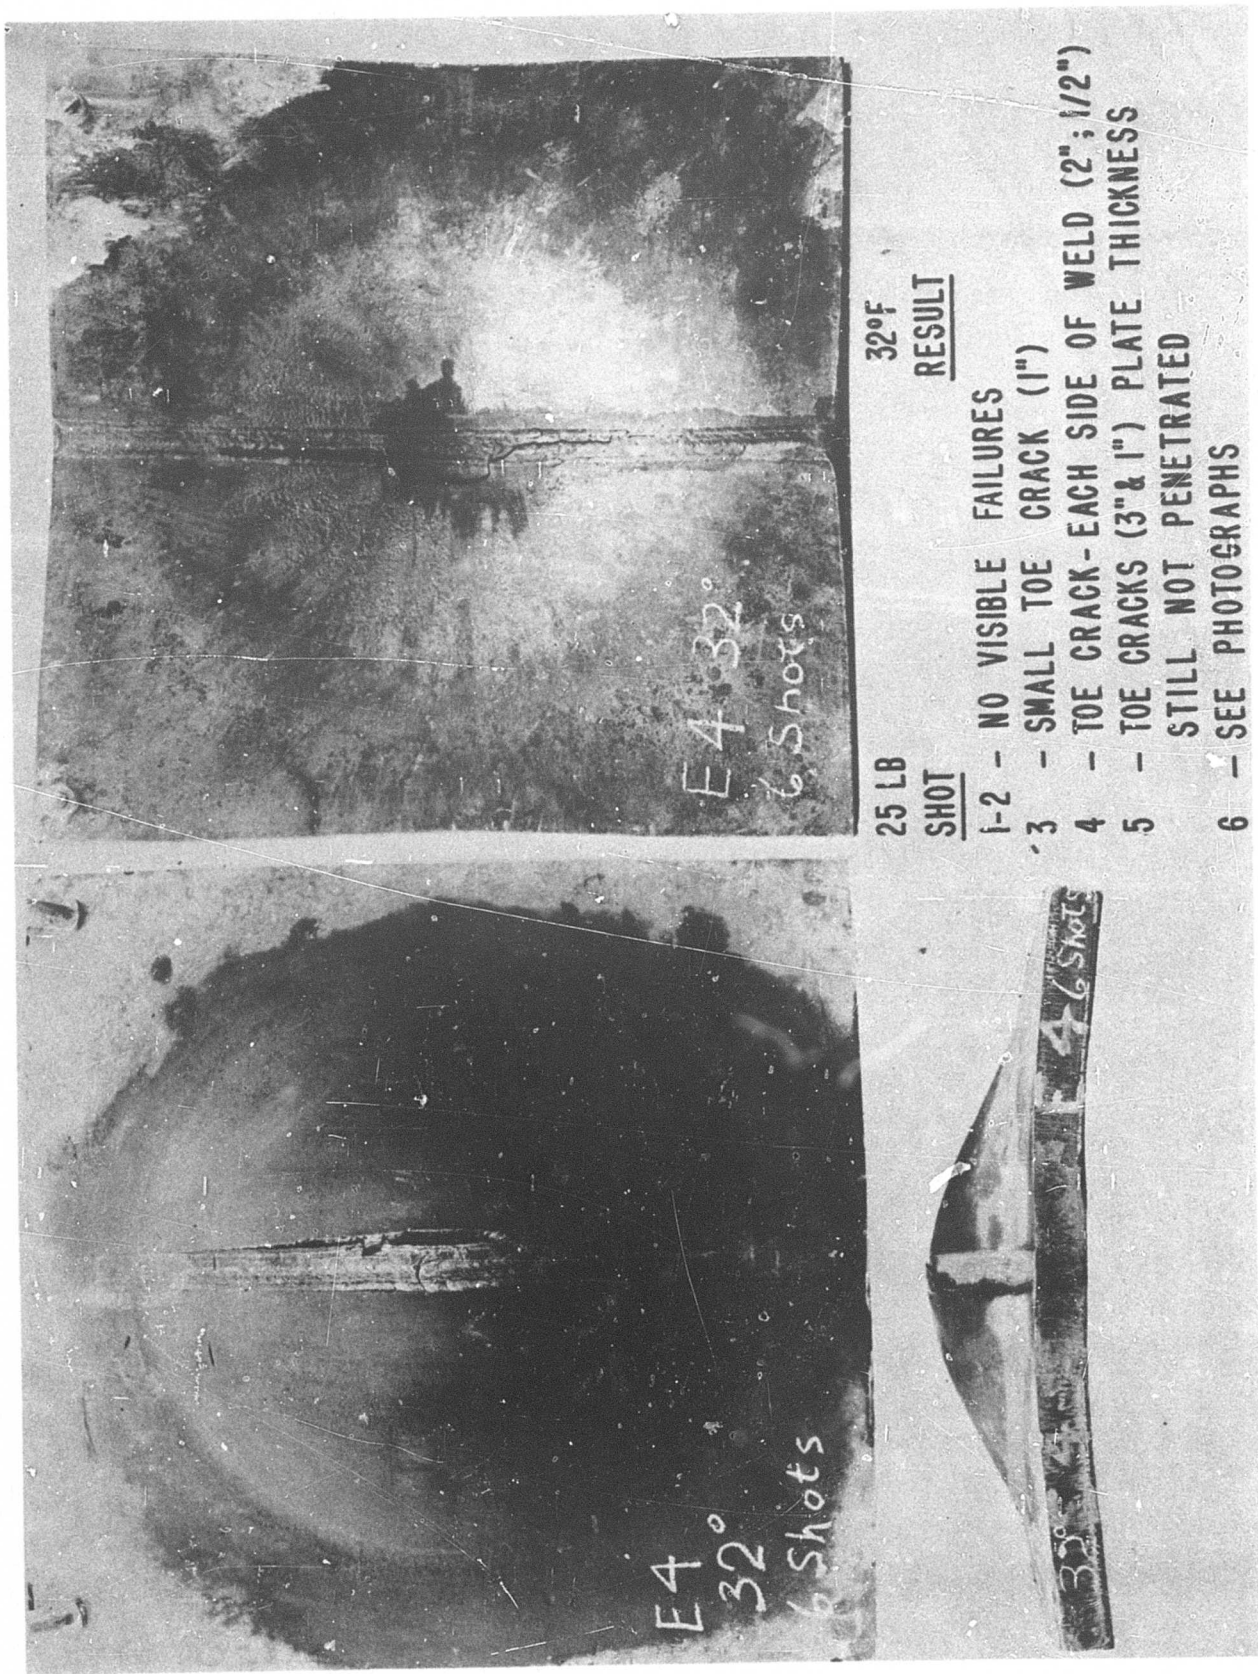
Explosion-bulge test fracture characteristics of manual
